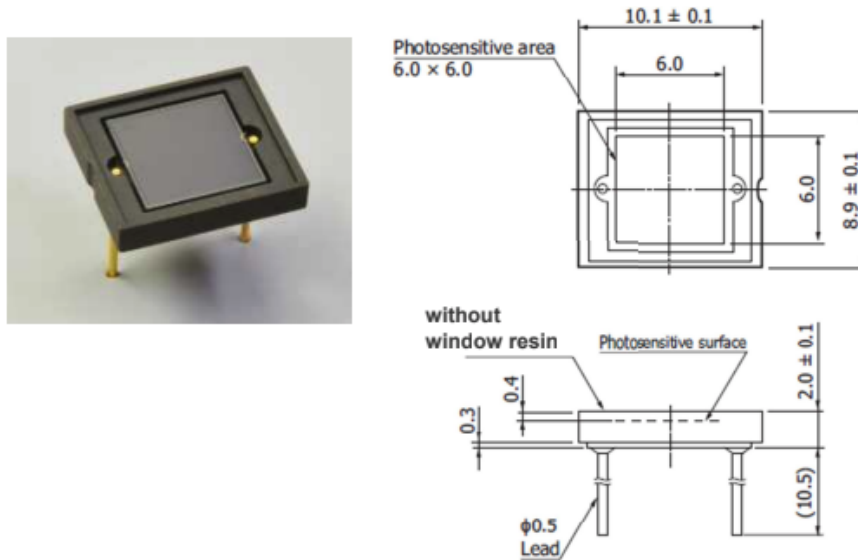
SiPM S13370-6050CN design drawings [34].
